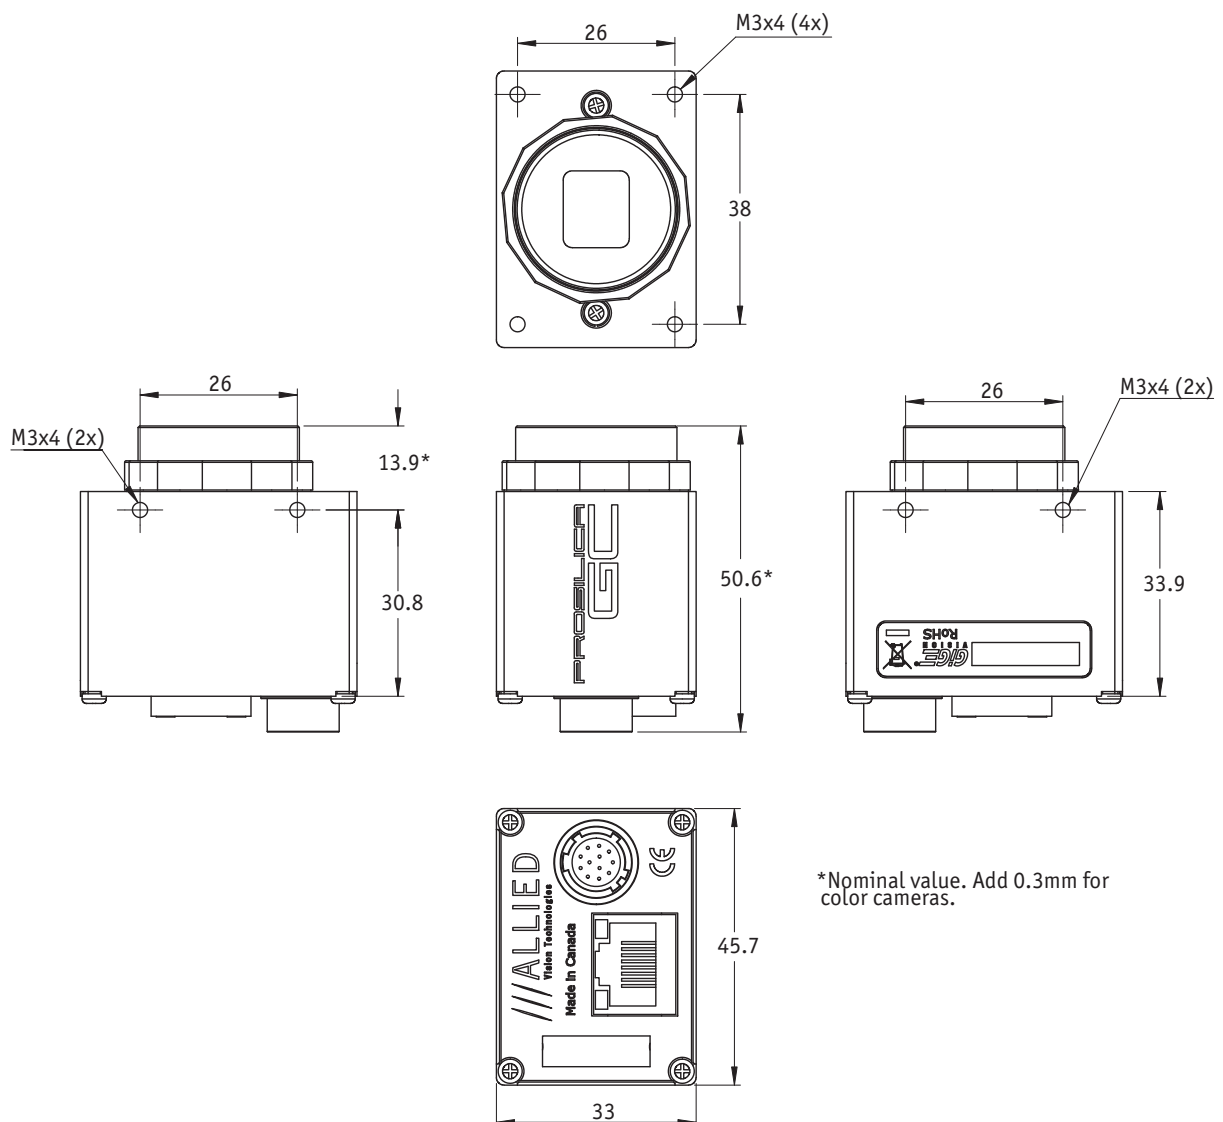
Mechanical dimensions for Prosilica GC750, and GC1280
